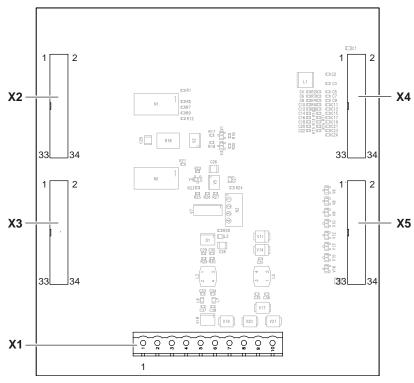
Printed circuit board view of EVAC-NL connector board FTI2002-N1
